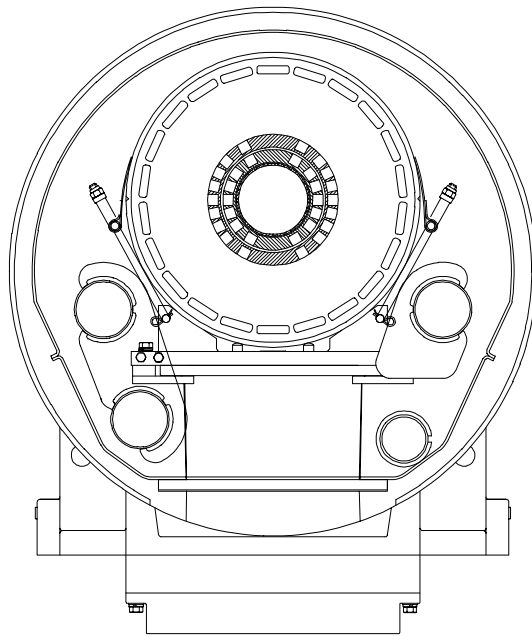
Helical magnet assembly in its cryostat. The outside diameter of the vacuum tank is 660 mm.
